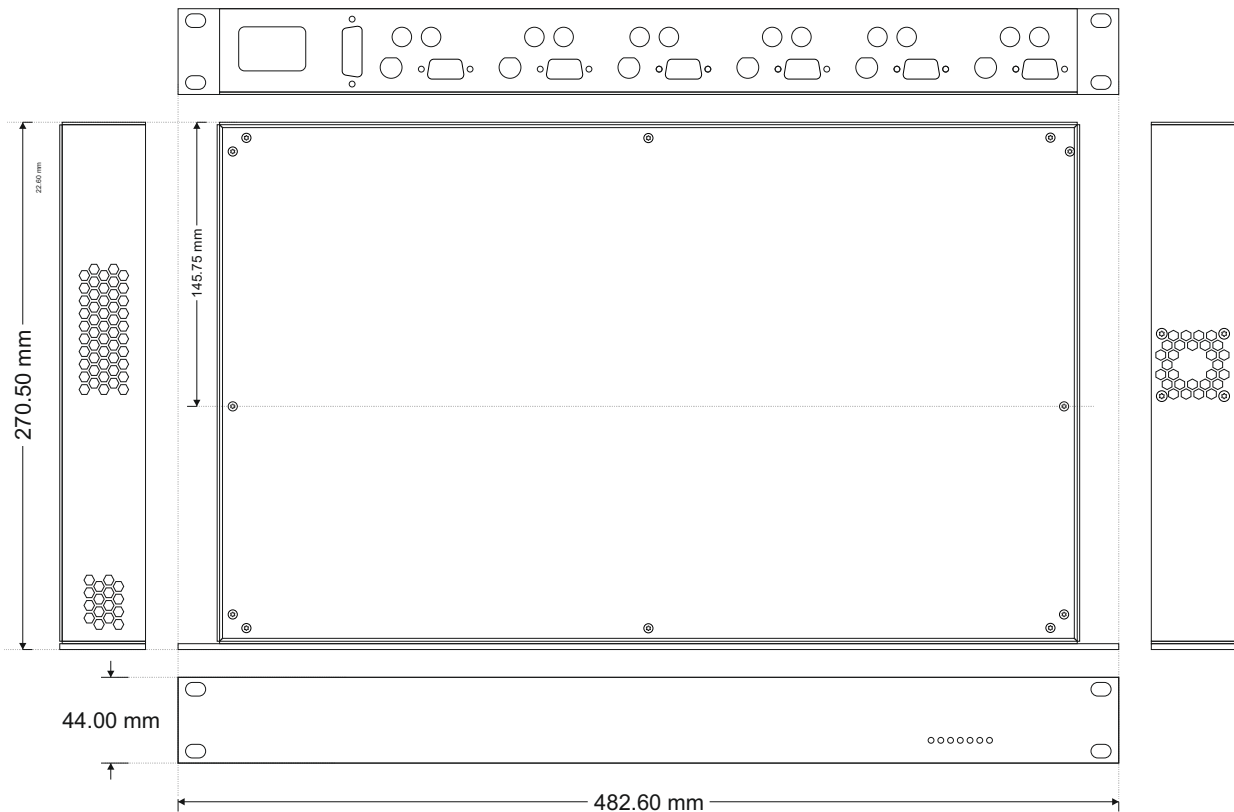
Mechanical Dimensions. Tolerance is 0.3 mm
